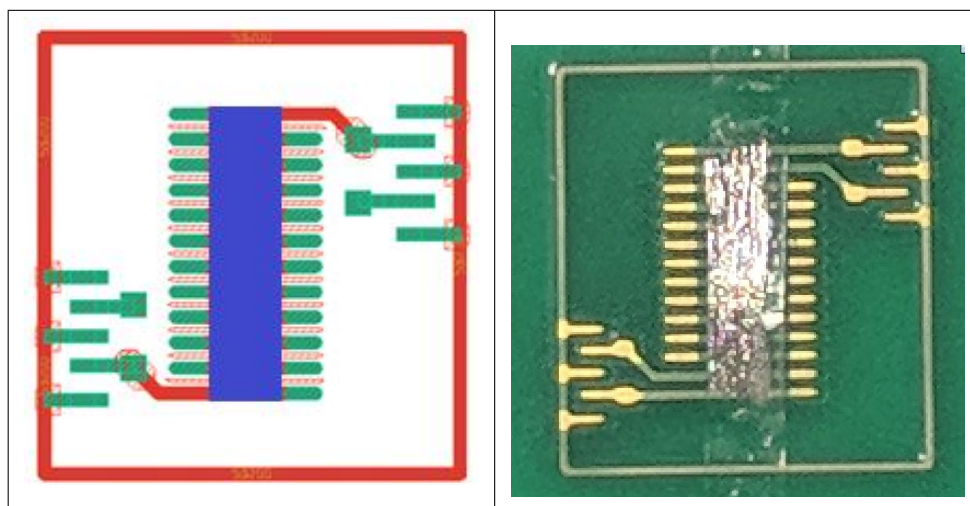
(left) Schematic diagram of PCB wirebond inductor prior to wire bonding step. Red are Copper Traces. Green are exposed Pads. Blue is the mounted released magnetic core. (Right) Image of PCB wirebond inductor prior to wire bonding step.
